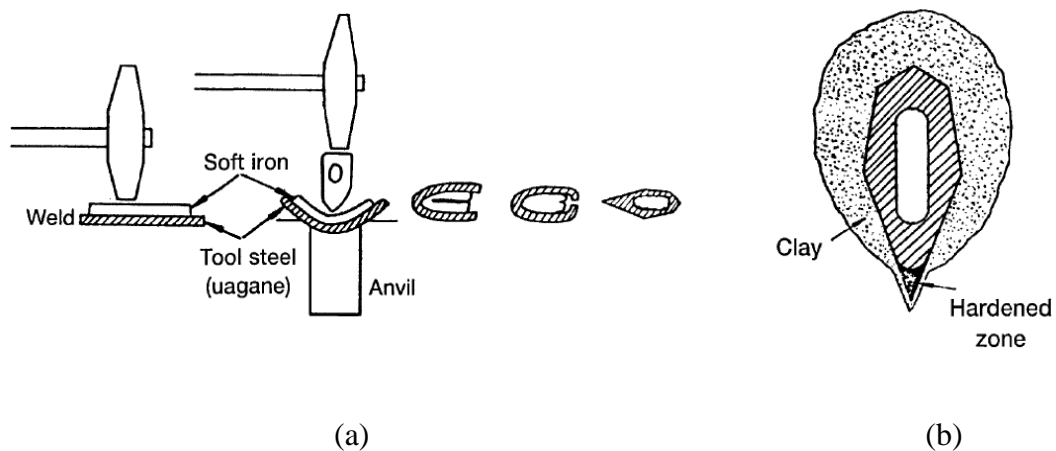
(a) Solid state welding (forging) of high carbon steel (case) with soft iron (core), (b) Heat treatment by covering with clay, (Lesuer et al., 1996).
